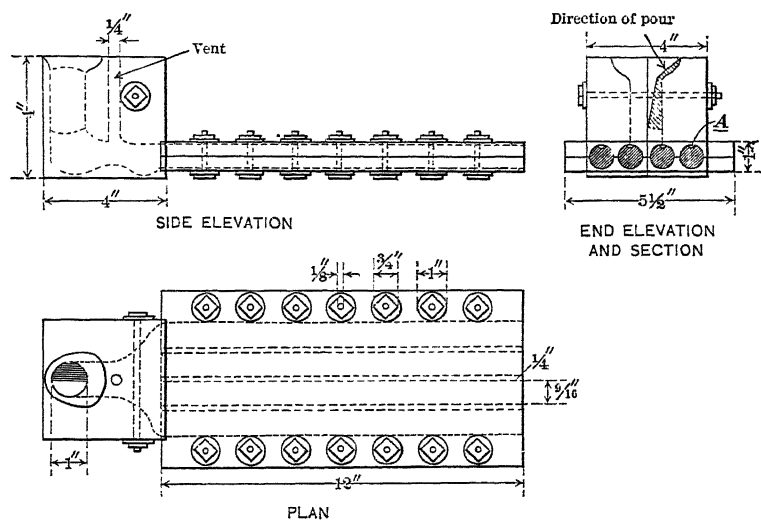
DETAIL DRAWING OF MOLD AND GATE.
